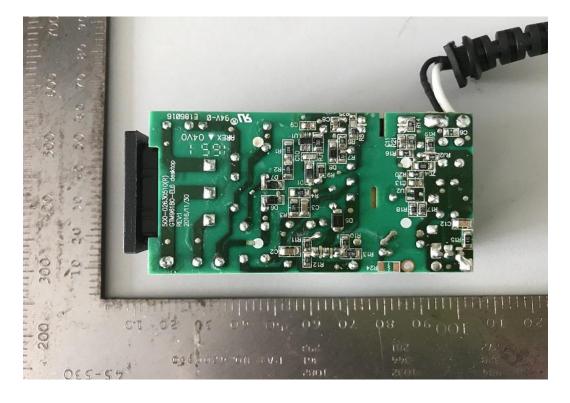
PCB view for GTM96180 series (Class I) without R22, R23 and R24
